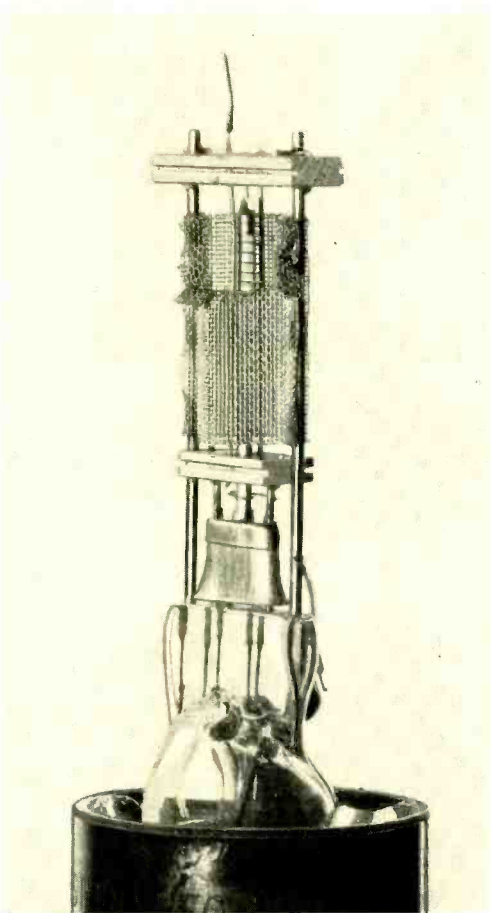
Assembled 262-A tube without bulb and with part of plate cut away to show the grid construction
